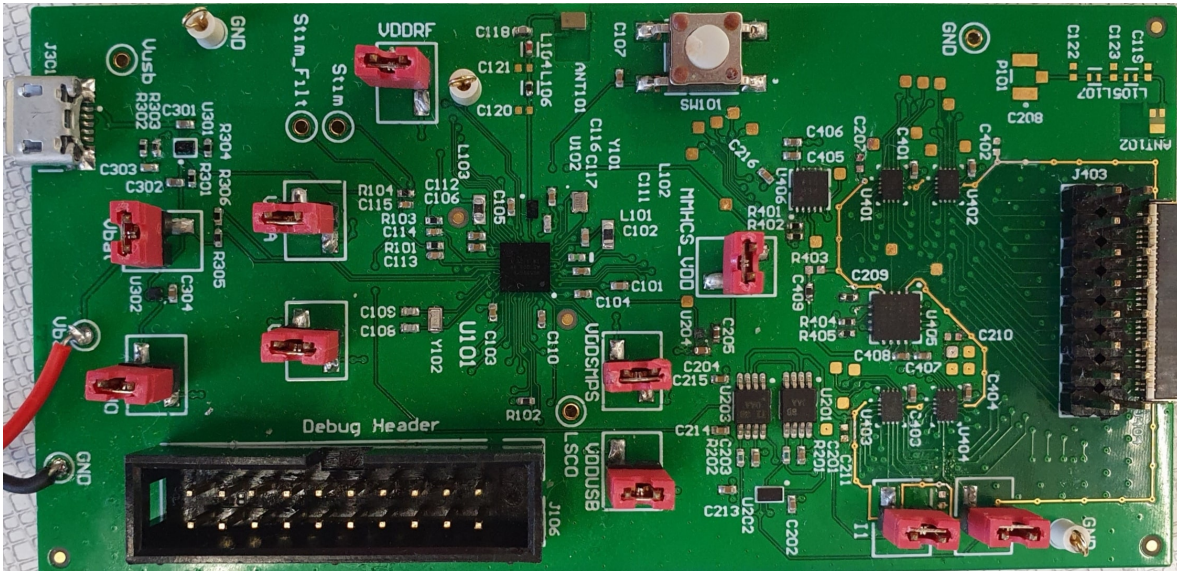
Prototype Vitapatch bioimpedance measurement PCB manufactured by Microsys
